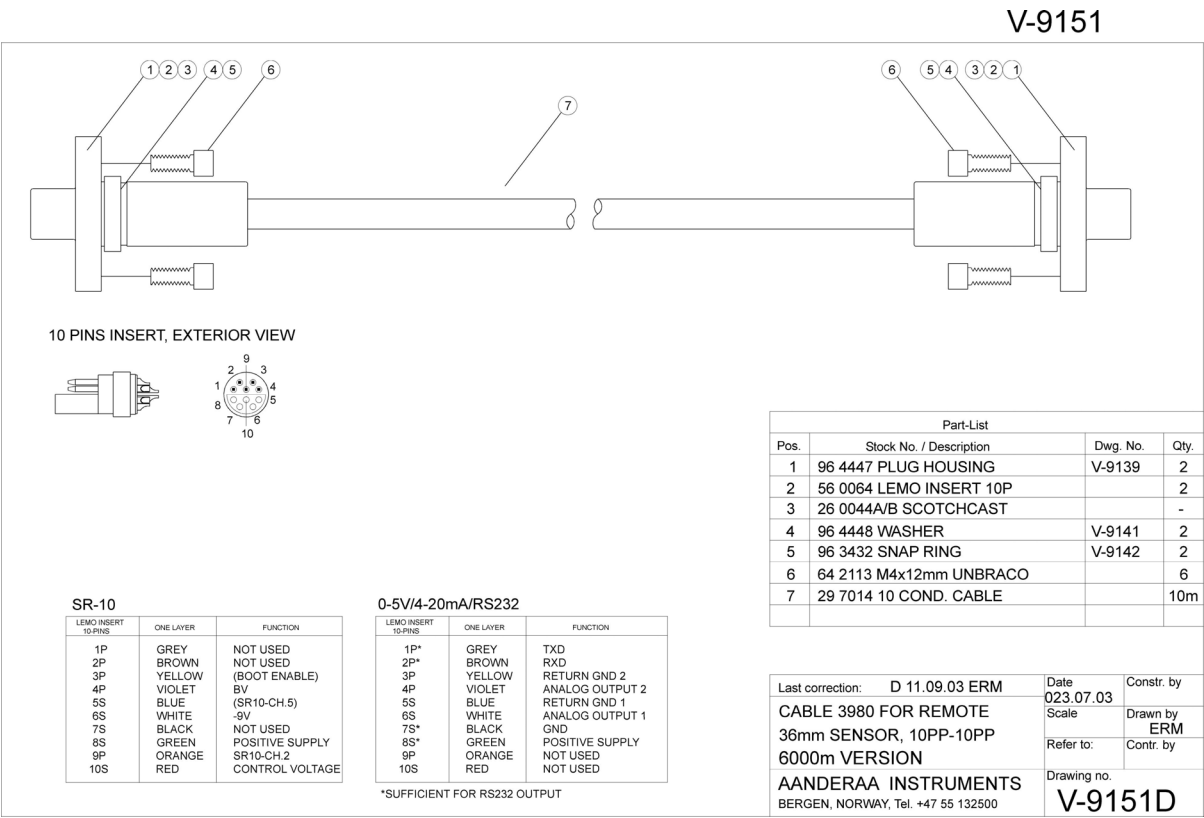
Drawing Cable 3980 (1000-6000 m)
